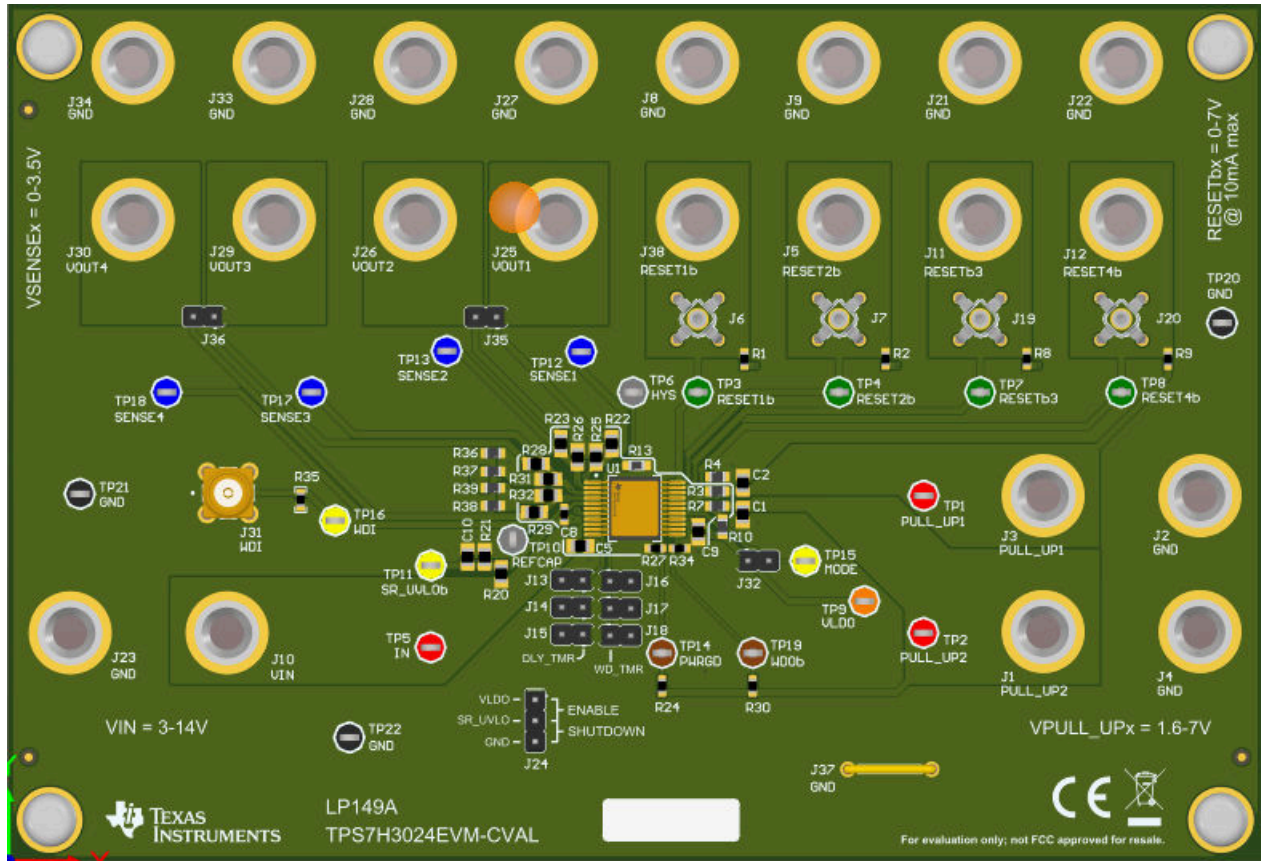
Printed Circuit Board Layout Example: Top Layer 3D View
